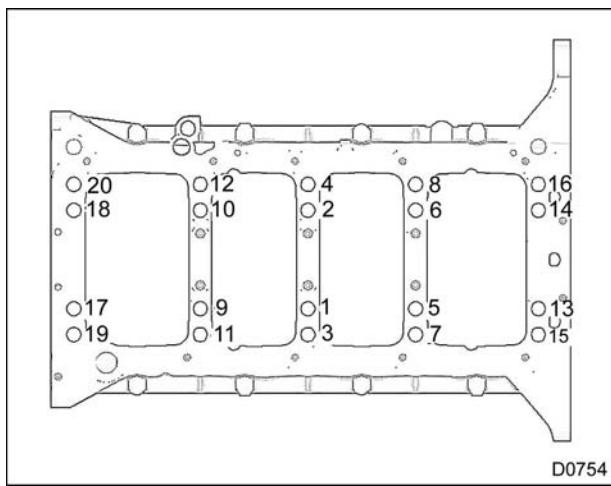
Torque sequence for main bearing mounting bolts to lower crankcase
